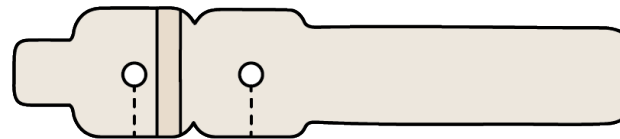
Design recommendation for the sticker to make pre-assembly possible
